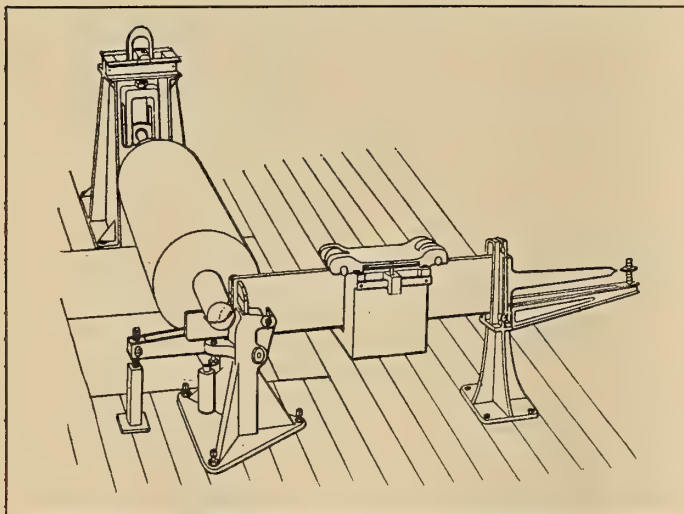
MARTIN ROTOR BALANCING MACHINE
